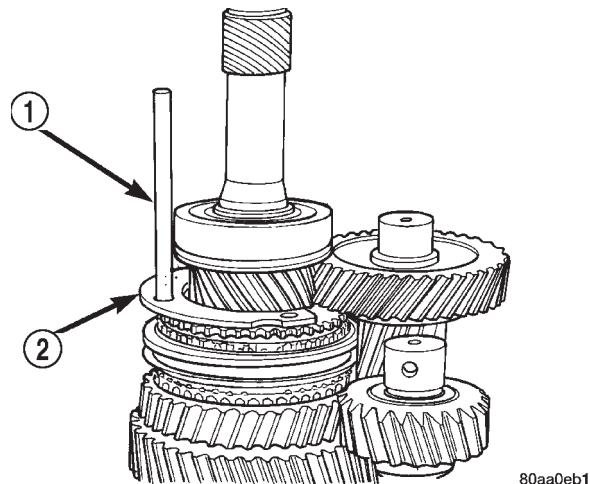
Reverse Idler Assembly Positioned On Assembly Fixture Pedestal
